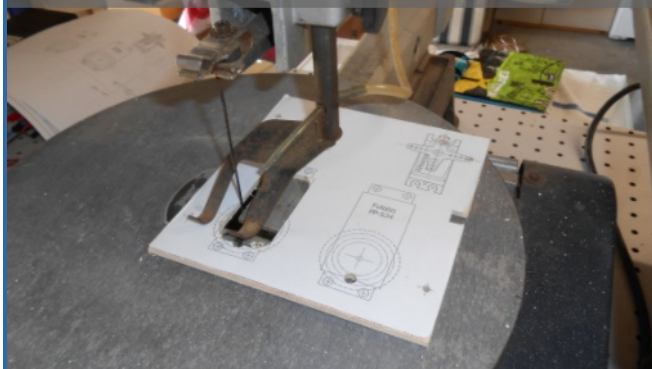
A quick check to make sure everything fits & it's time to drill the holes for the mounting screws.
